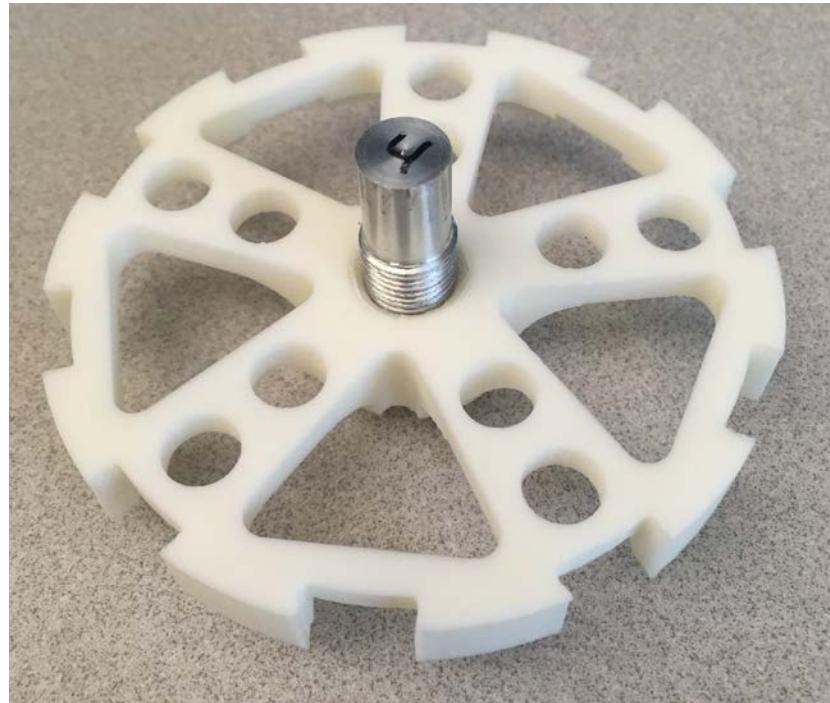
1/2" Threaded Rod on "Bypass Bearing Drill Attachment"
